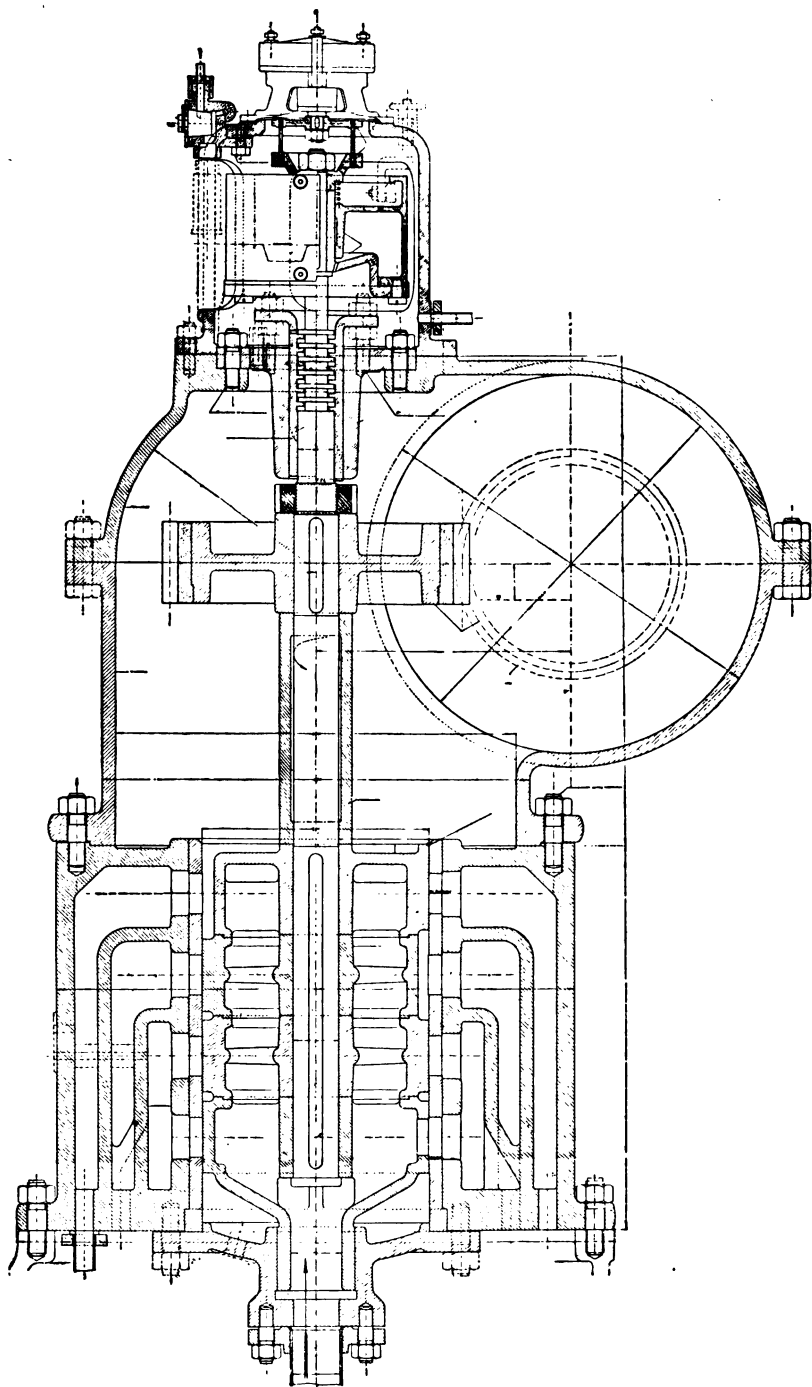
Section through rotary oil-distributor for actuating the valves.
